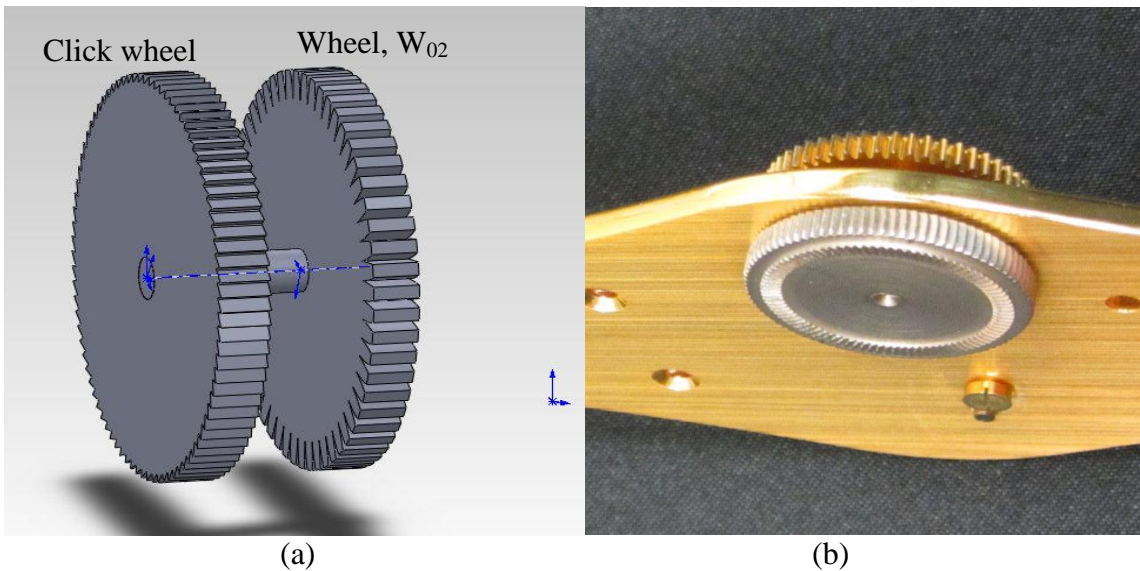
Click wheel, W_{01} , and wheel, W_{02} , assembly of the gear train with (a) Solidworks view, and (b) photograph of component mounted on plate
